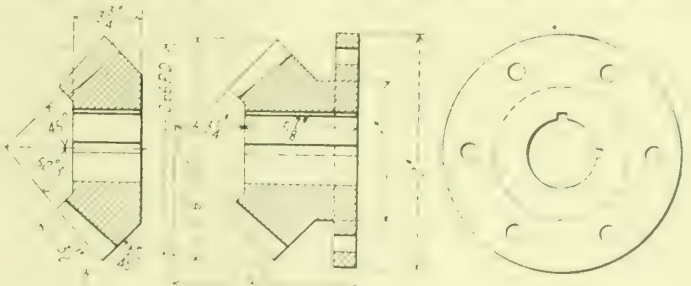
GEARS FOR 24IN. MILL TABLES; FORGINGS, 0.08 TO 0.12 PER CENT. CARBON STEEL. ABOUT 24 HOURS REQUIRED FOR ¼IN. PENETRATION.
